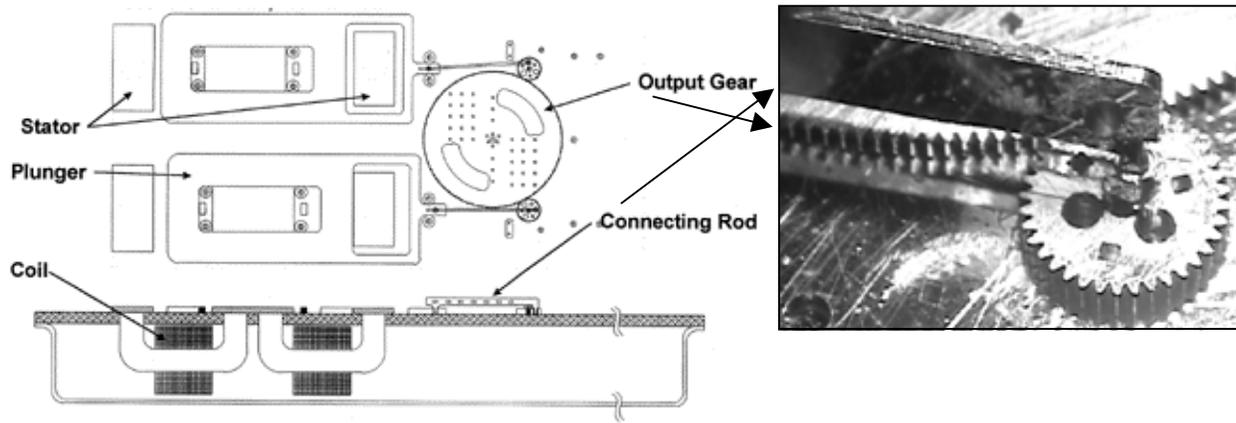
Top view of assembled milliengine. The diameter of the output gear is 12 mm.
